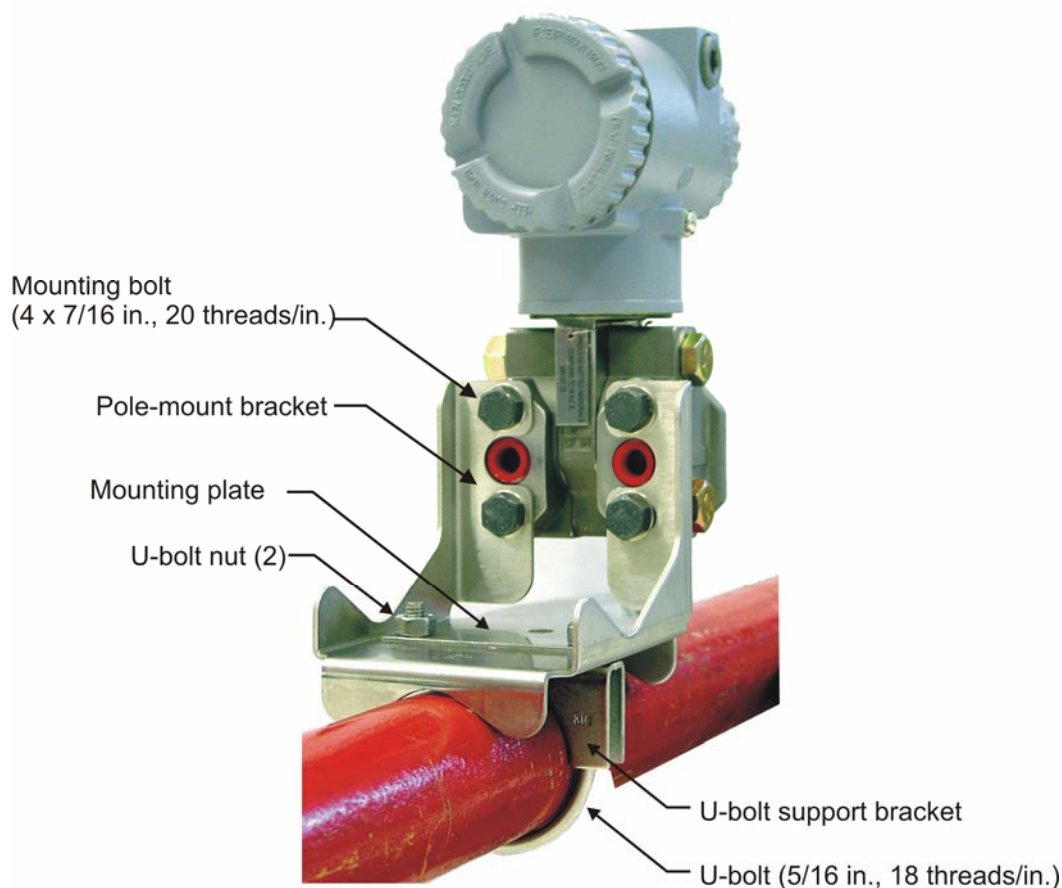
Remote-mount installation to horizontal pipe; shown with standard sensor with side process connections and optional mounting kit
